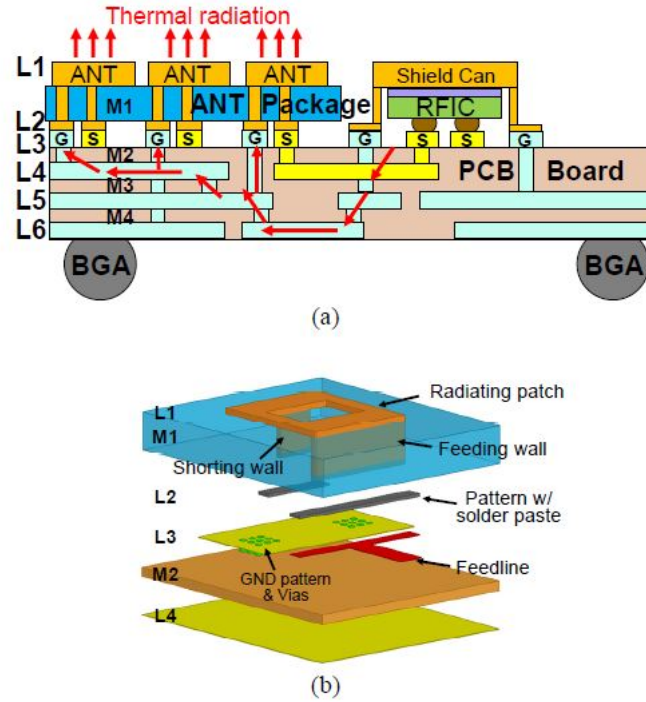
Illustrations of the proposed stamped metal AiP: (a) The cross-sectional view of the entire package. (b) The exploded view of the radiating element. (from [18])
